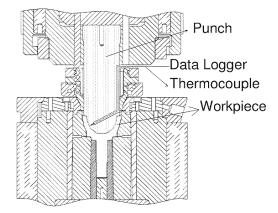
Warm forging 4th stage detailed cutting section, showing the measurement system.
